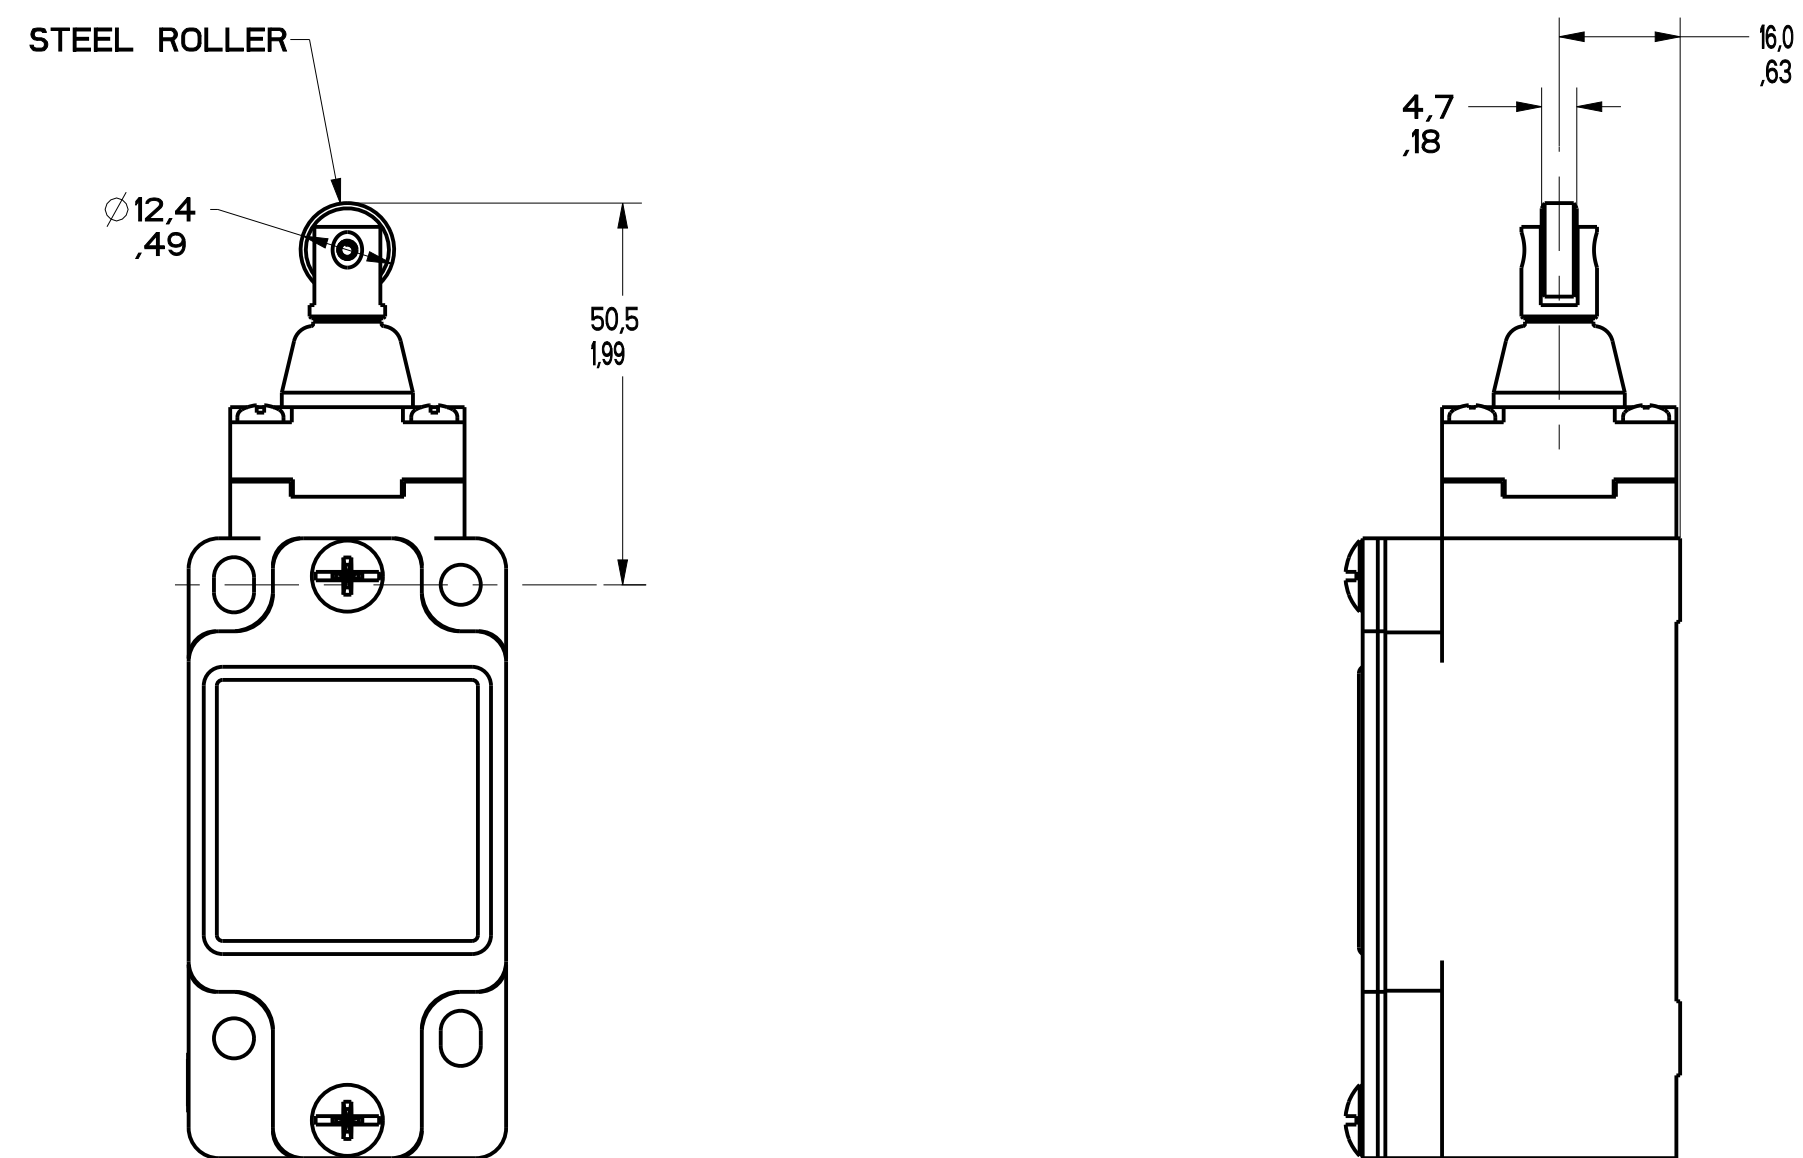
TOP ROLLER PLUNGER HEAD
